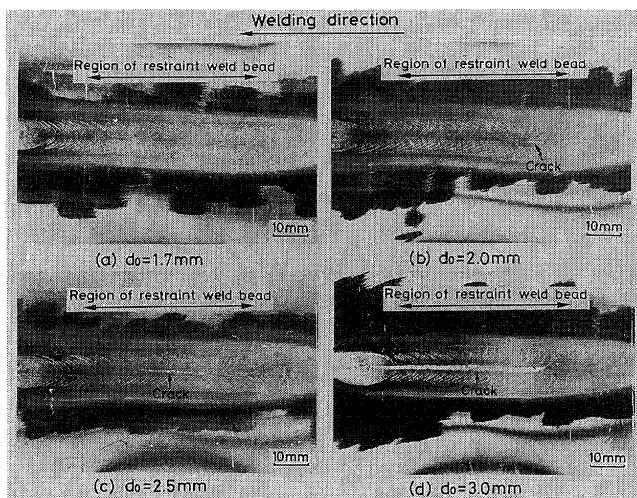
Appearance of cracks in tensile cracking test with U-form hot cracking device.
